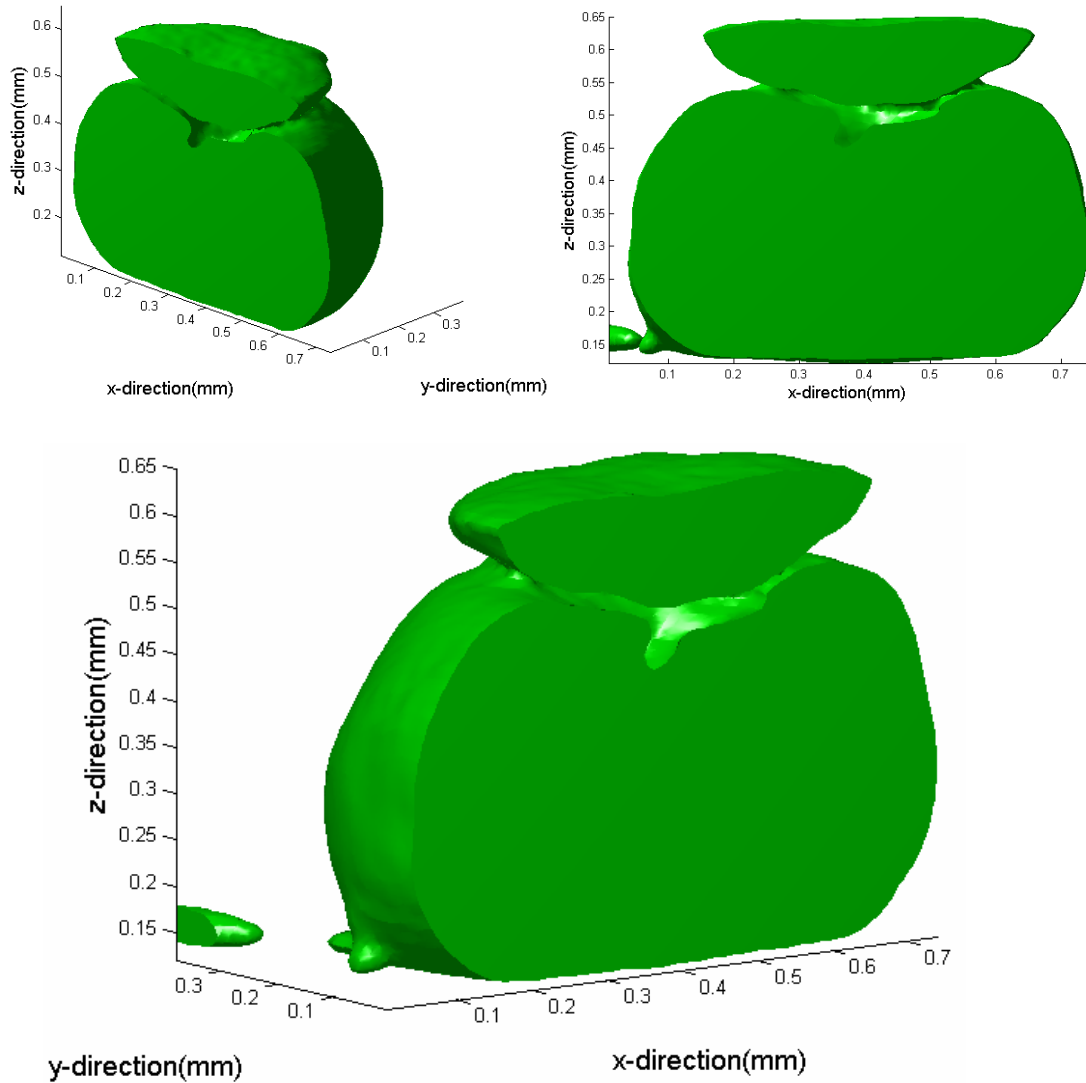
Mechanical Bending Crack on Solder Joint
